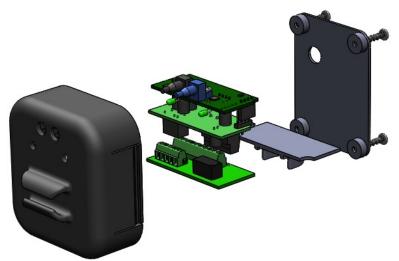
Enclosure NOTE: Board configuration shown is not consistent with the wireless device. Figure is to illustrate enclosure only.
